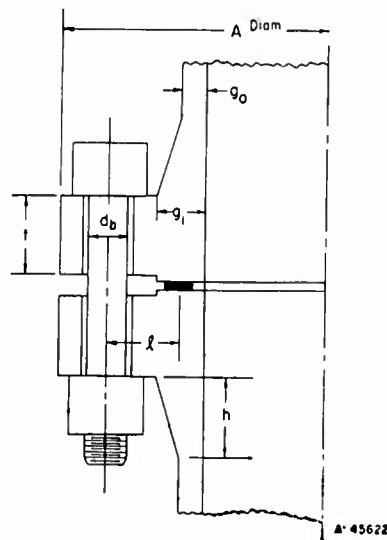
ILLUSTRATION OF INDEPENDENT DIMENSIONAL VARIABLES IN A BOLTED FITTING
